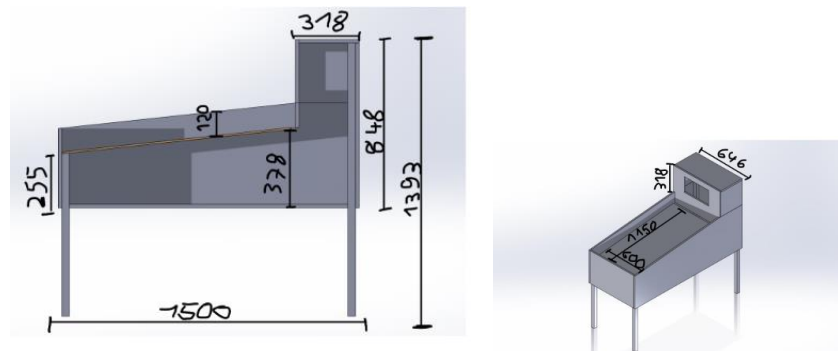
Pinball Machine Frame Dimensions (dimensions in mm)
